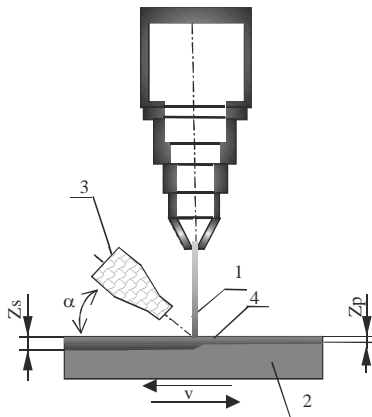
Working scheme of the HPDL laser Rofin D1 020 used for remelting and alloying of the hot work tool steel samples
